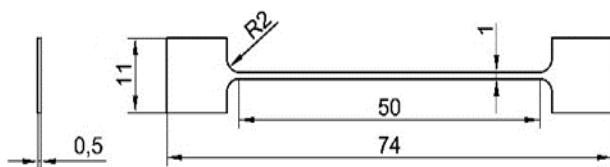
Shape of DC01 specimen for tensile testing on SLTTD
